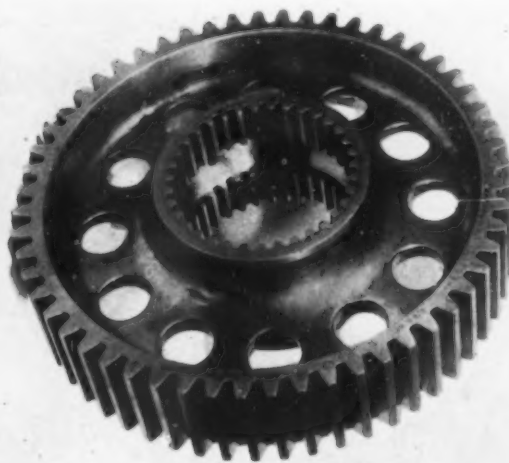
Mercedes-Benz D.B. 601A airscrew shaft gear wheel.
